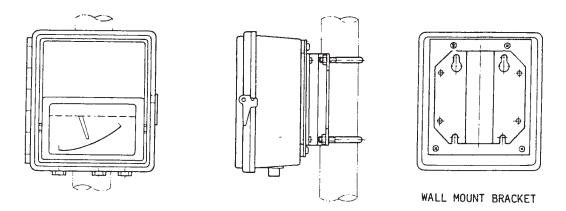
Pipe Mount or Wall Mount (with Brackets)
